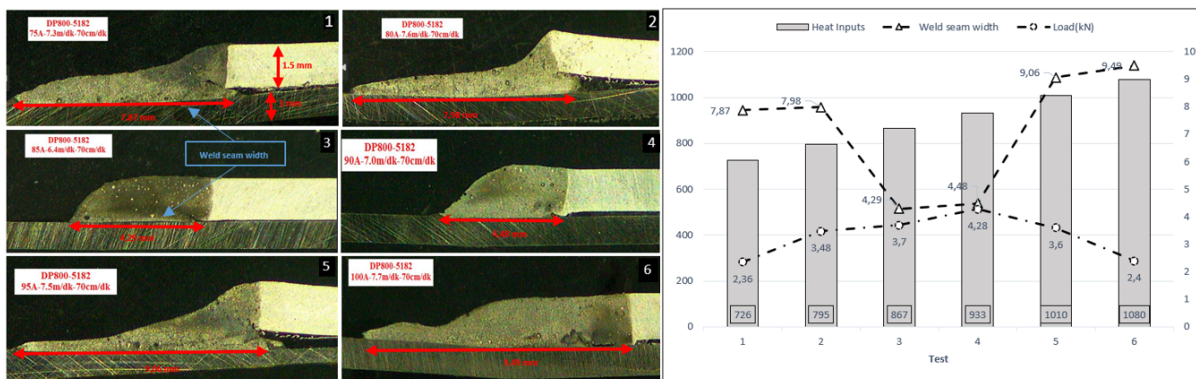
Sample-1-2-3-4-5-6 macro images and head inputs, load, weld seam width comparison
